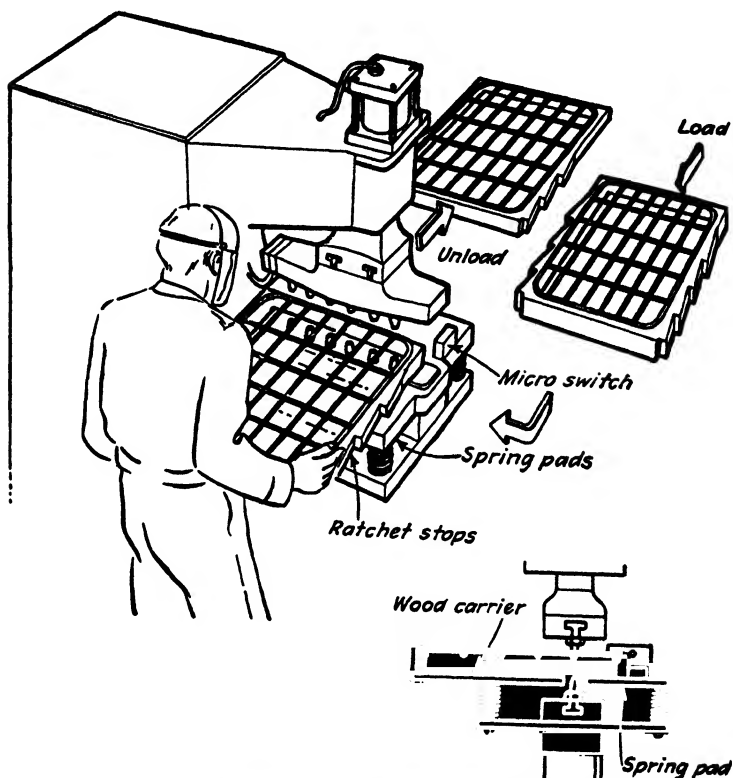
Spot welding wire racks accurately and quickly.
